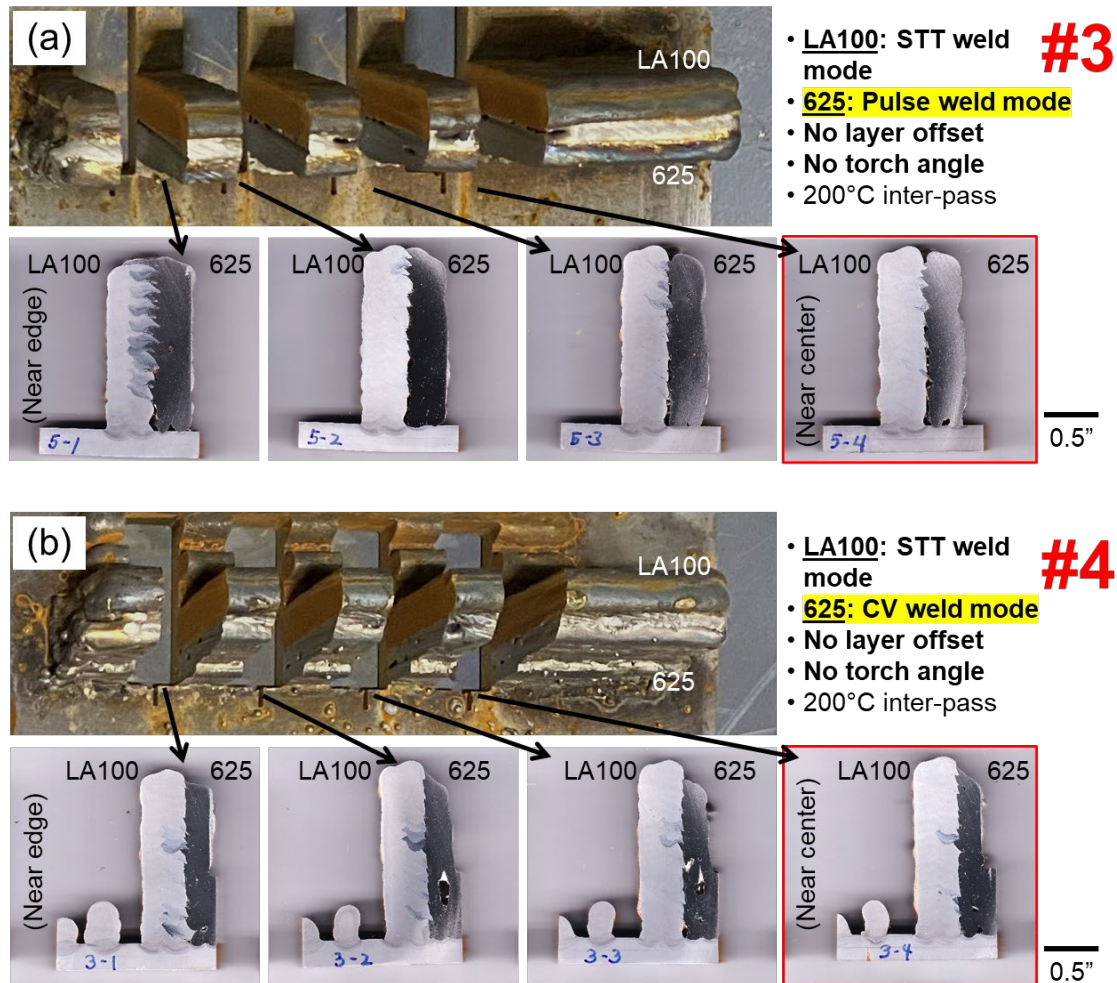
Pictures showing the trial walls and their cross-sections: (a) trial wall #3, and (b) trial wall #4.
